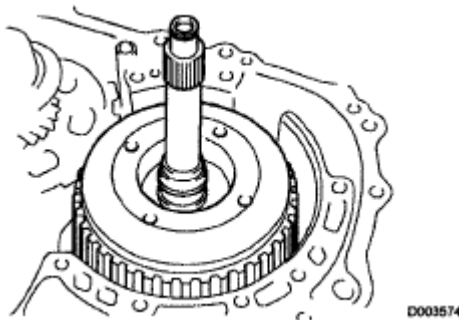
Installing Forward Clutch To Multiple Clutch Hub
